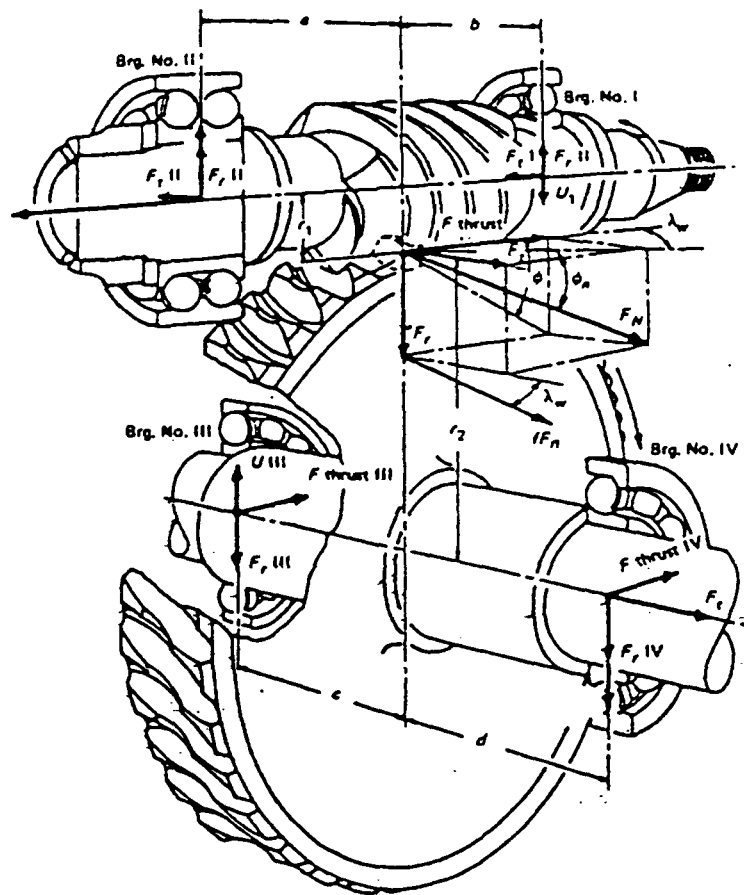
Bearing loads due to worm gearing. [Courtesy New Departure—Hyatt Bearings Division, General Motors Corporation.]
